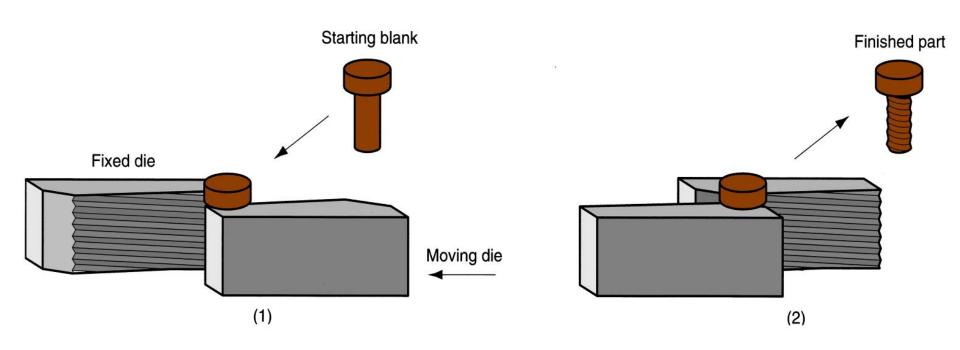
Thread rolling with flat dies: (1) start, and (2) end of cycle.
